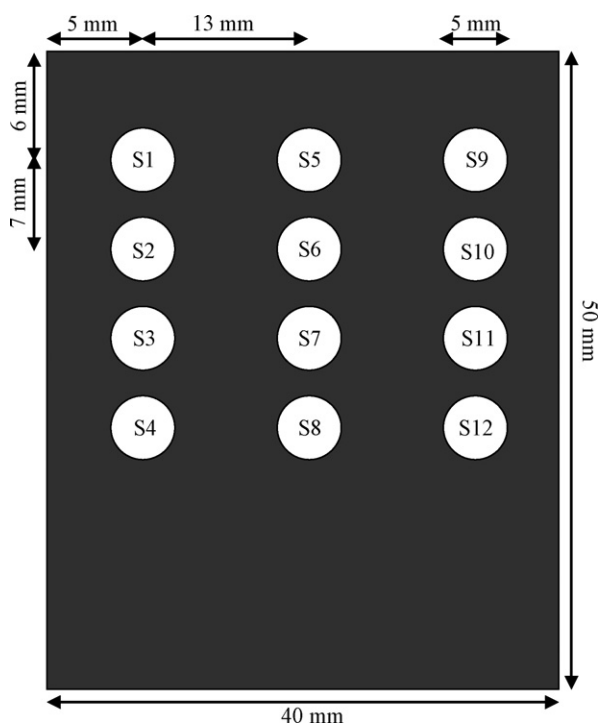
Design of the sensor array support indicating membrane positions and dimensions.
